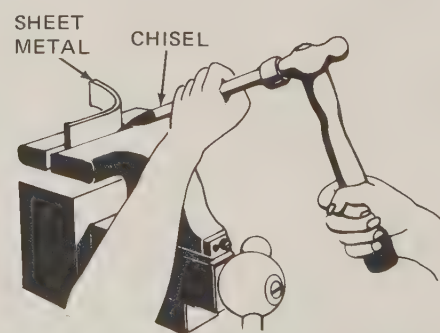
How to use a chisel and hammer to cut sheet metal.
